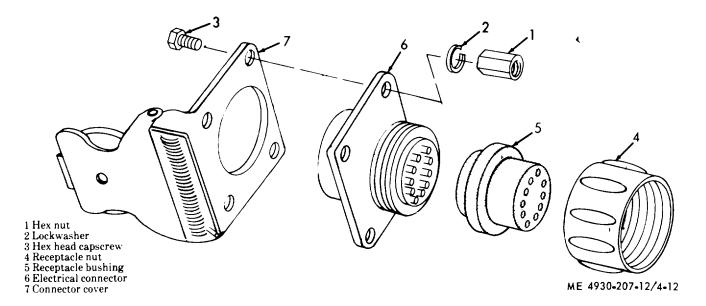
Intervehicular receptacle, disassembly and reassembly.
